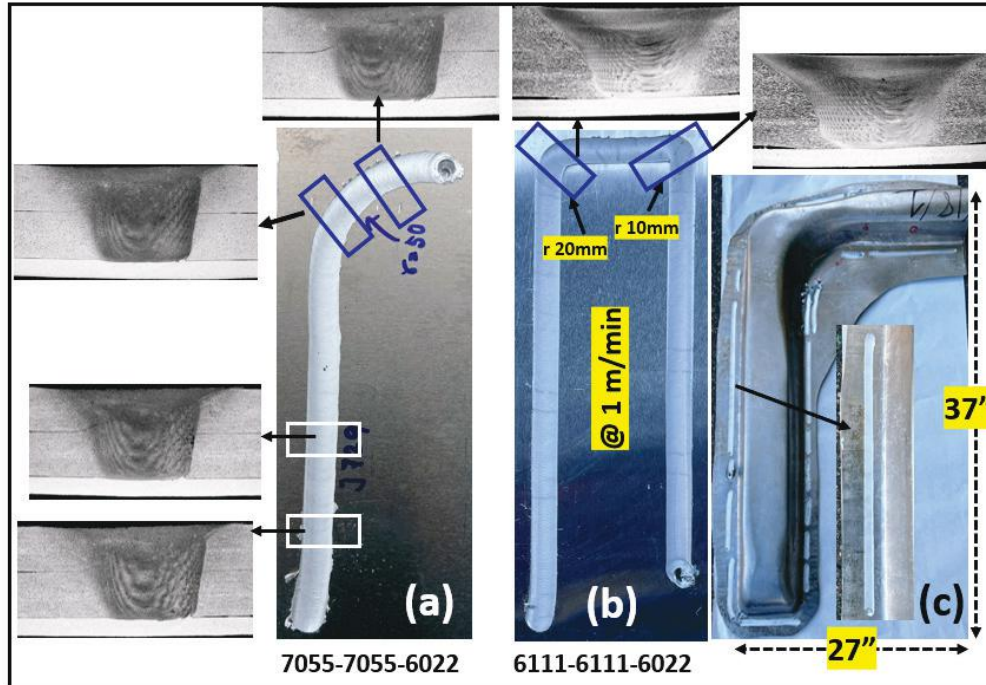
Curve welding on (a) 7055-7055-6022 stack and (b) 6111-6111-6022 stack with a macrograph of cross-sections. (c) FSLW of demonstration stamped part (inset: ~ 500 mm long weld without any surface defect). Source: PNNL.
